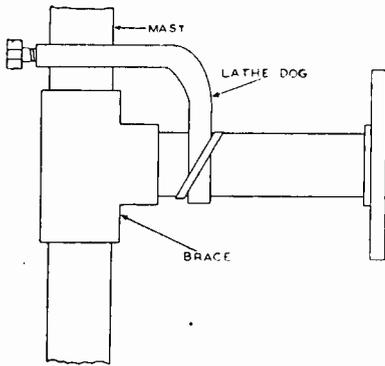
A lathe dog on the bottom brace makes a very fine lock for the mast.
